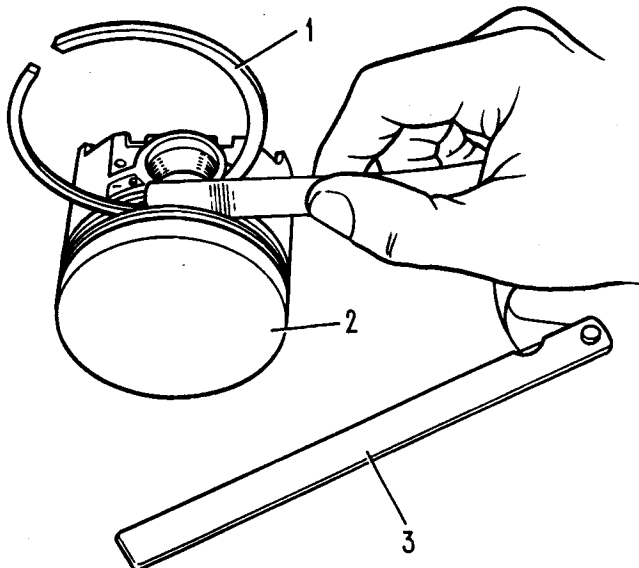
Checking Piston Ring Side Clearance: 1 - piston ring; 2 - piston; 3 - set of feeler gauges
